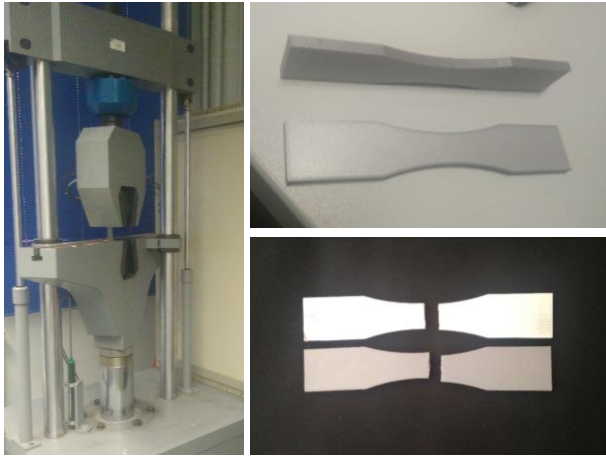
Tensile testing equipment (left) and 3D-printed specimens, before (upper right corner) and after (bottom right corner) the test. Grey specimens are printed with PLA and white ones are printed with ABS.
